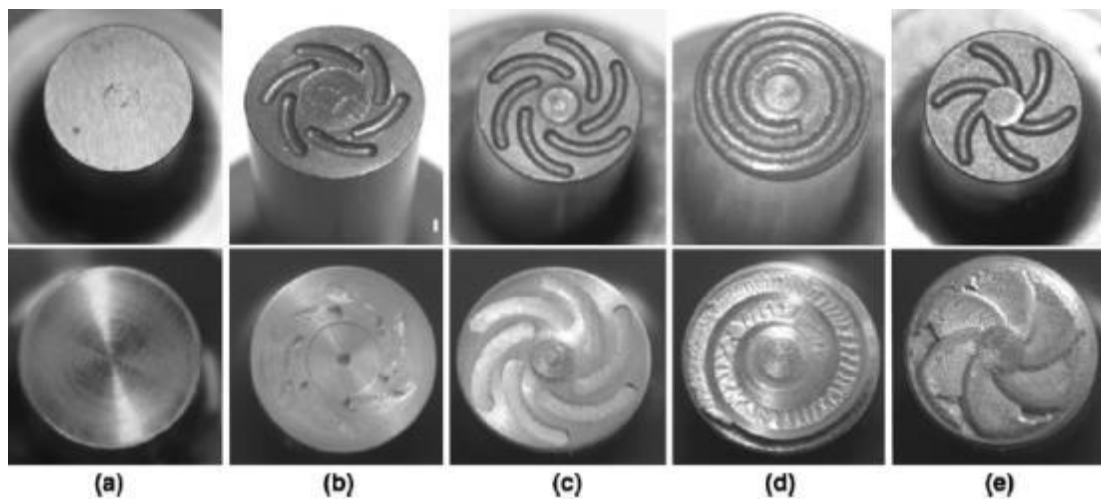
Different FSSW shoulder features shown before and after twenty welds: (a) featureless tool, (b) the short flute wiper tool, (c) the long flute wiper tool, (d) the fluted scroll tool, and (e) the proud wiper tool (Bakavos, Chen et al., 2011)
